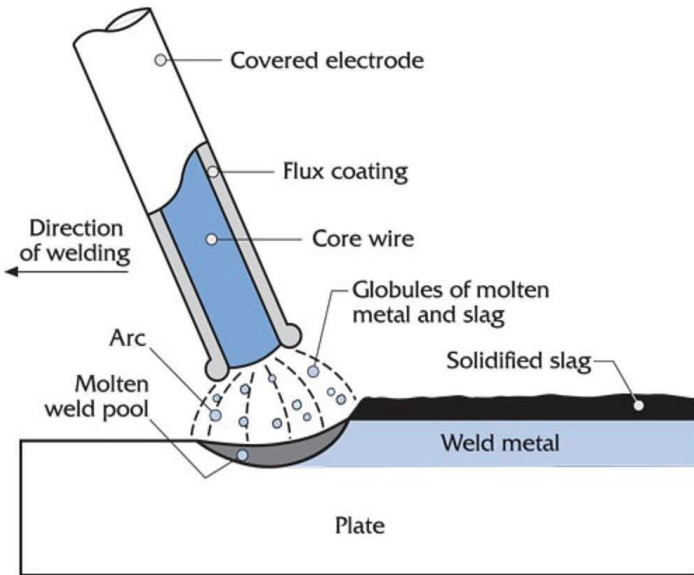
Shielded Metal Arc Welding (SMAW) parts in illustrated (galvanizeit.org, 2023).
